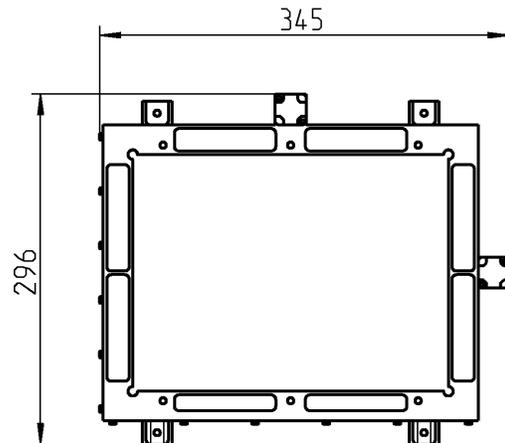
Footprint of the mounting frame of the VIRGO II⁺ sensor package.
